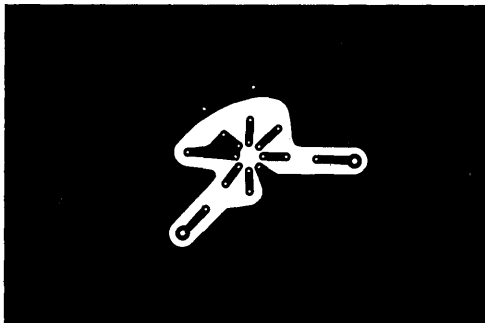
PC layout for 50-Ω line driver (see Fig. 6)
